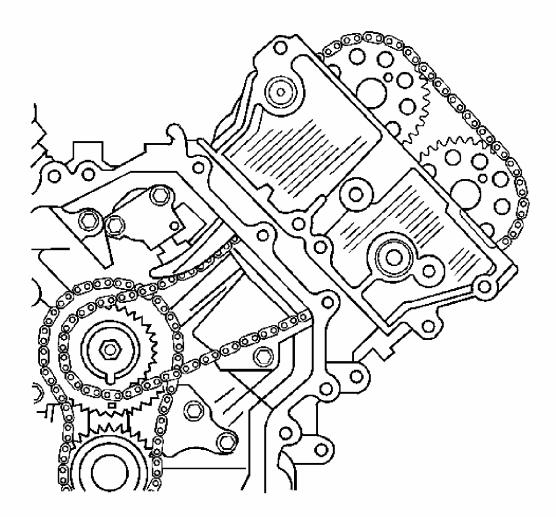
View Of Secondary Camshaft Drive Chain Tensioner Courtesy of GENERAL MOTORS CORP.
